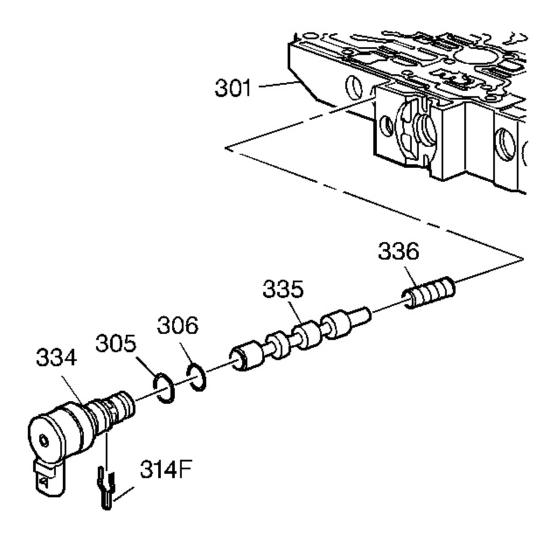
View Of TCC PWM Solenoid Courtesy of GENERAL MOTORS CORP.
